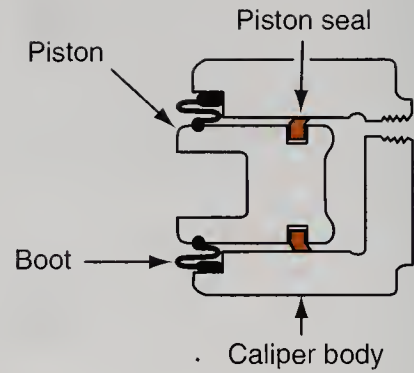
A rubber boot keeps dirt and moisture out of the caliper bore.
